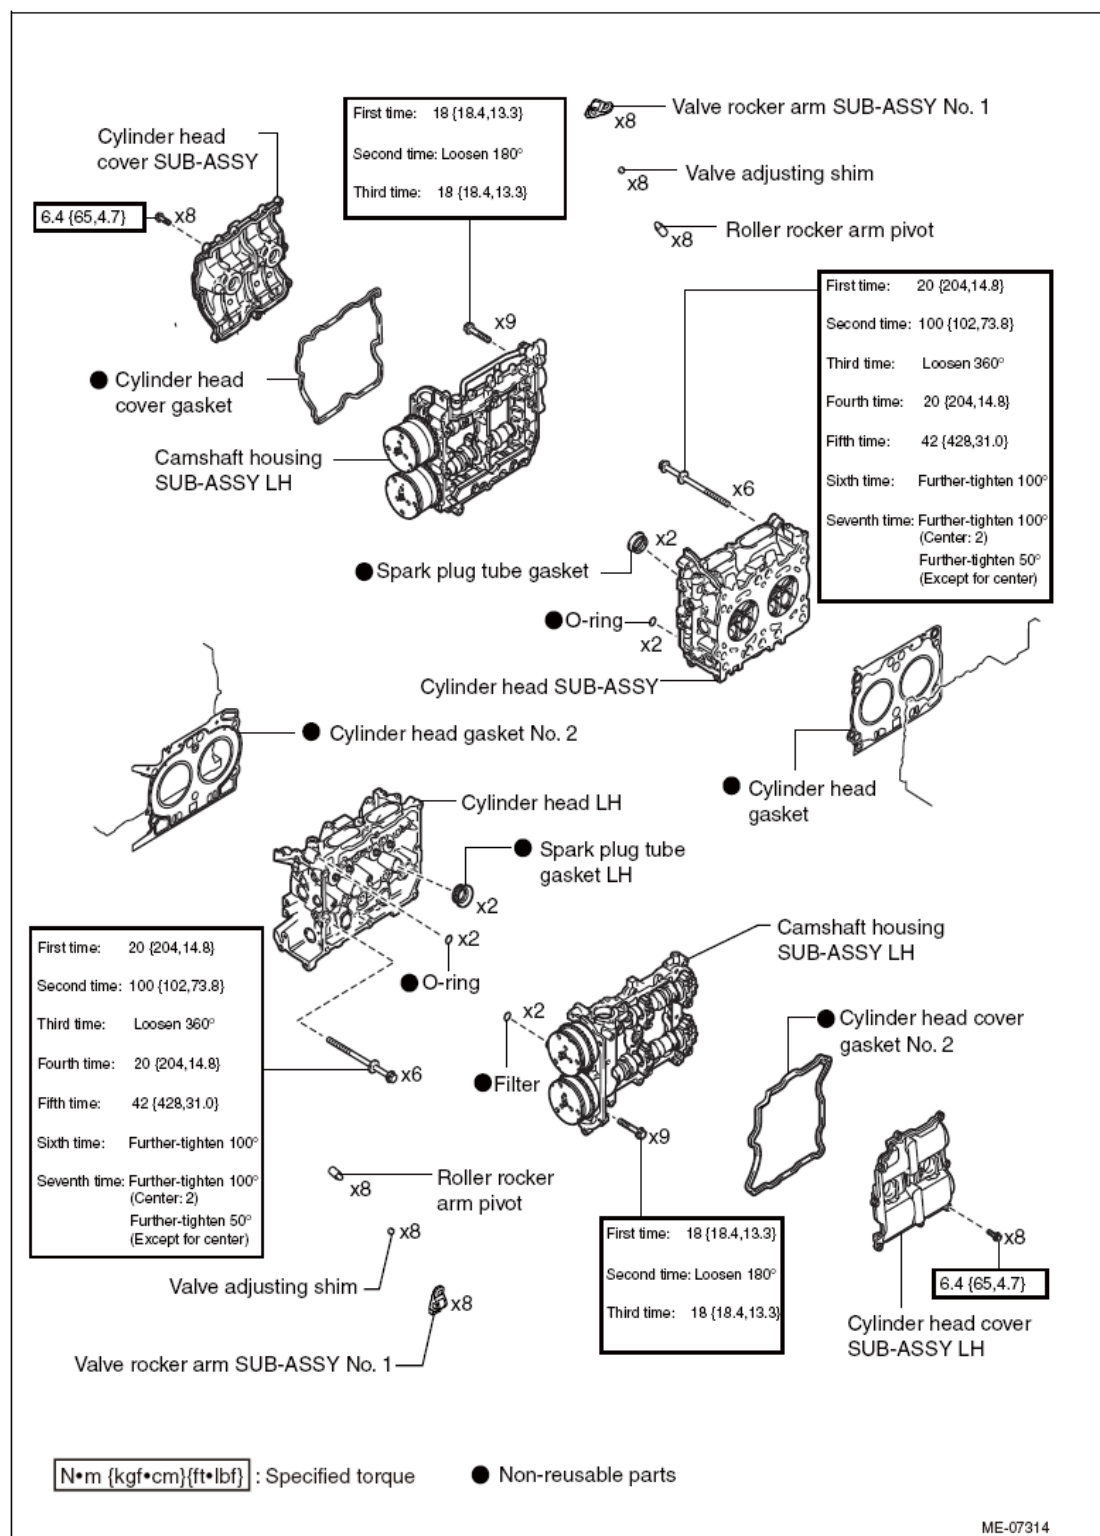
Identifying Partial Engine Assembly Components With Torque Specifications (FA20) (17 Of 17)
